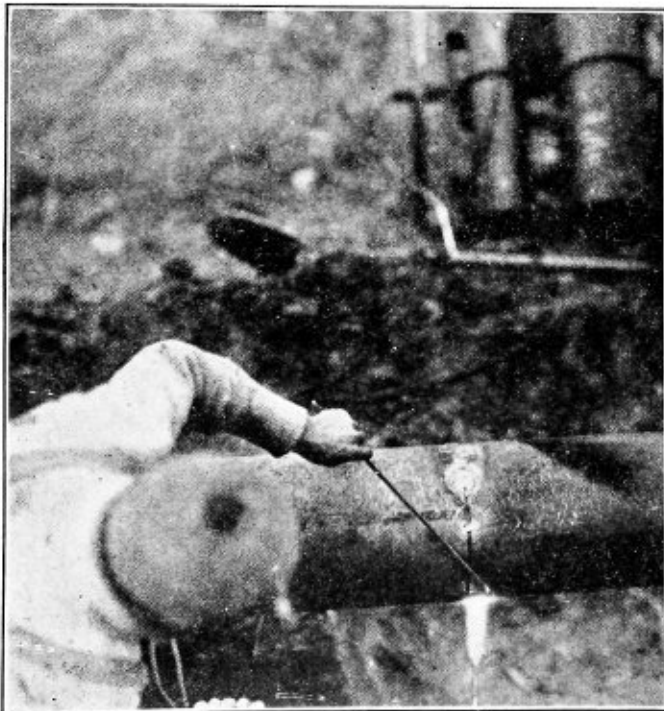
"Tacking" Pipe Ends Before Welding
